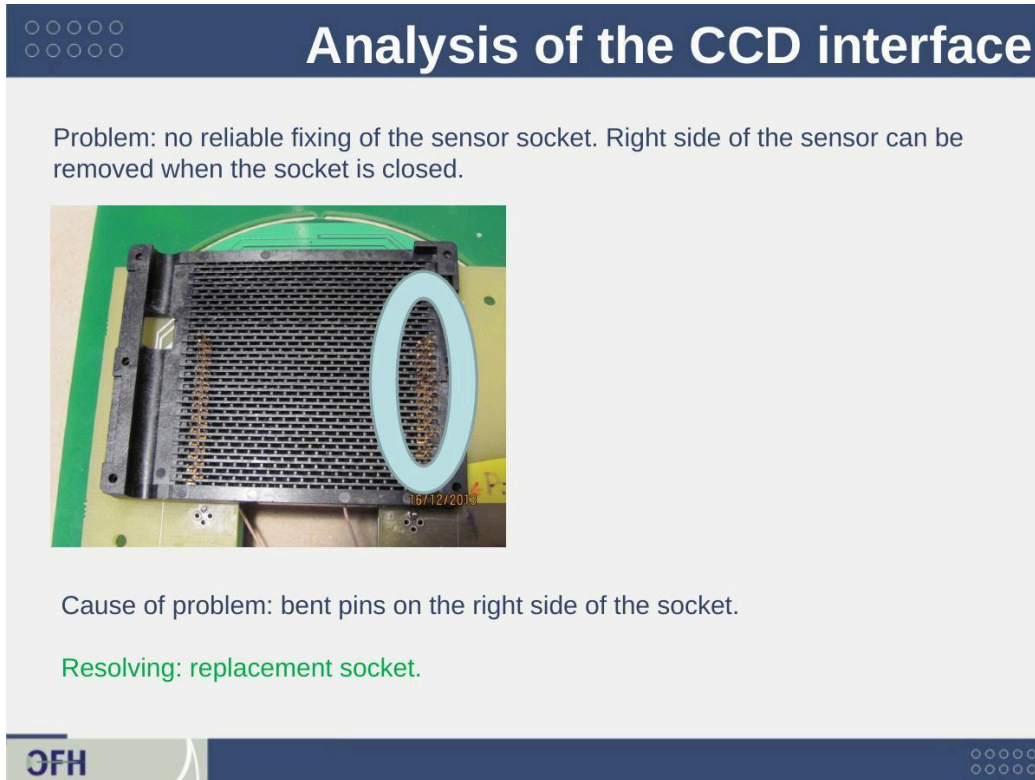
CCD sensor socket with bent pins (circled) on the right side preventing reliable retention of the Perkin Elmer RL-series CCD. Physical inspection identified this mechanical issue before electrical measurements began. Resolution: socket replacement.
